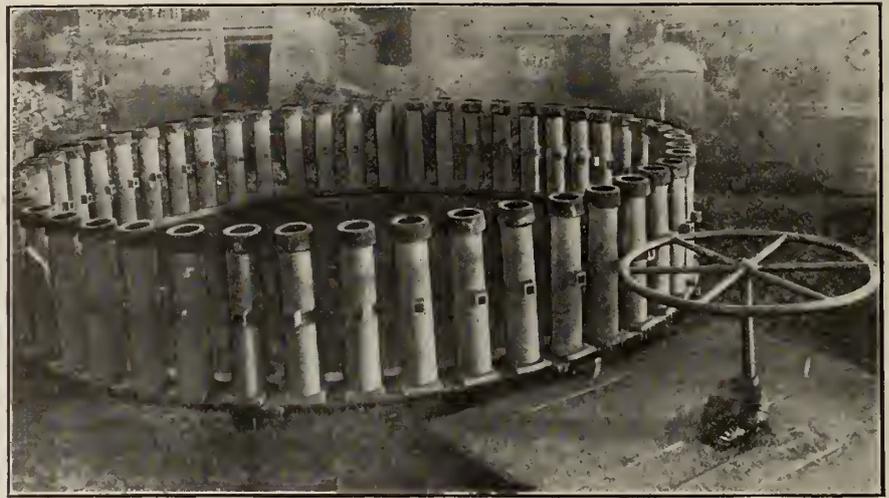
BATTERY OF INGOT MOLDS READY TO BE Poured.
